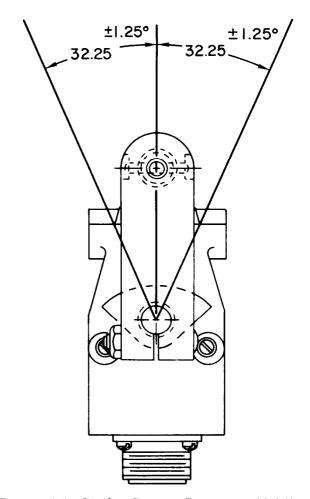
Stroke Setting Diagram, 32.25°, Part No. R460M15-3 and R460M15-11.
